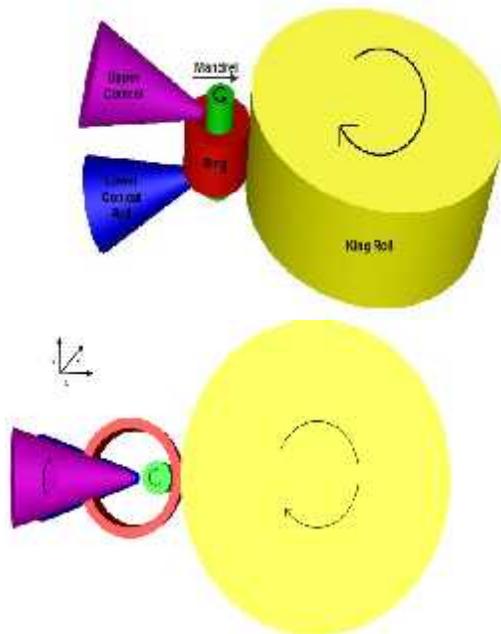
(a) 3-D View of Ring Rolling Process, (b) Schematic View of Ring Rolling Process
